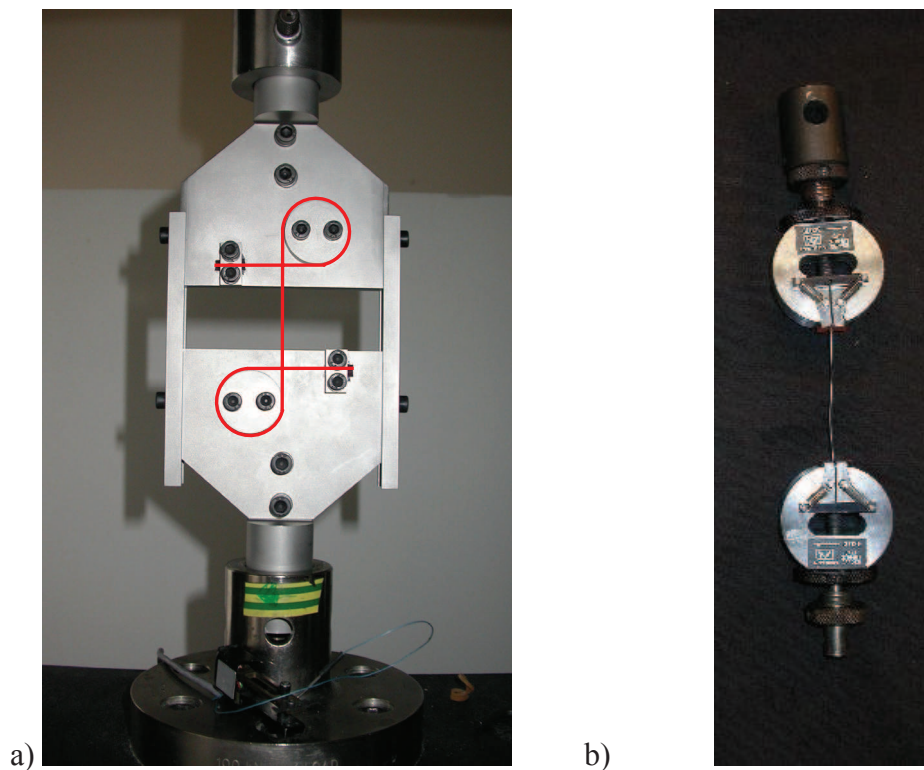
a) Third attempt with double capstan device. b) Fourth attempt using keyless clamp specially dedicated to millimetre size wires.
